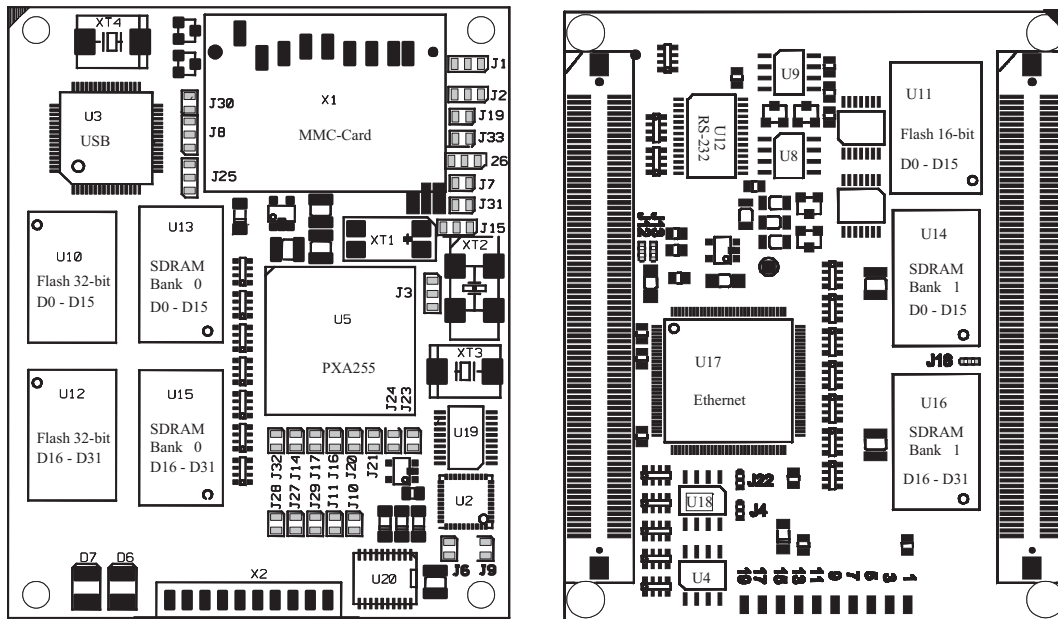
View of the phyCORE-PXA255, PCB Revision 1219.3
